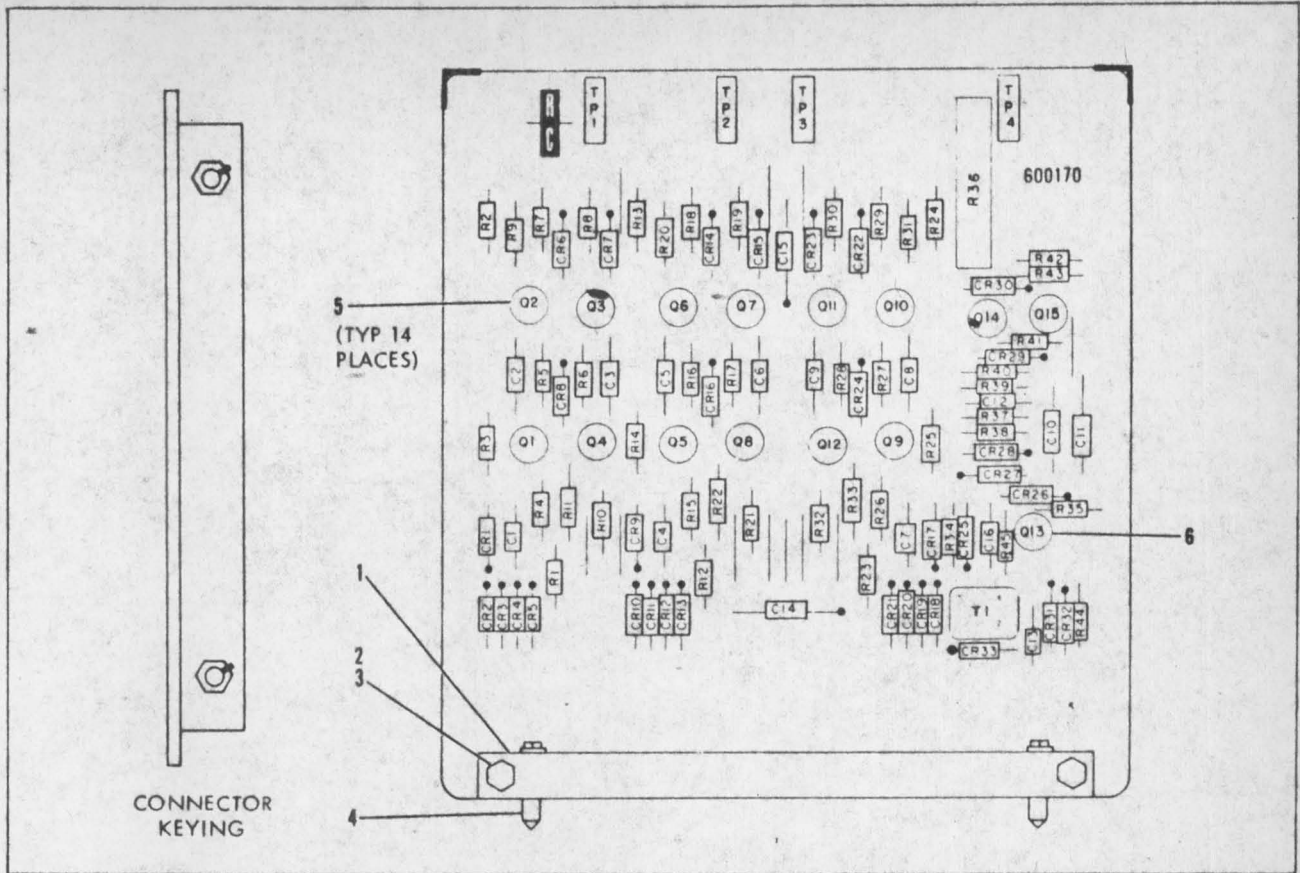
Power Driver and One Shot Model 600170, Parts Location
